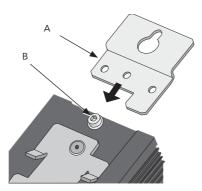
Fitting upper bulkhead mounting bracket (32A unit shown; 63A units similar)
